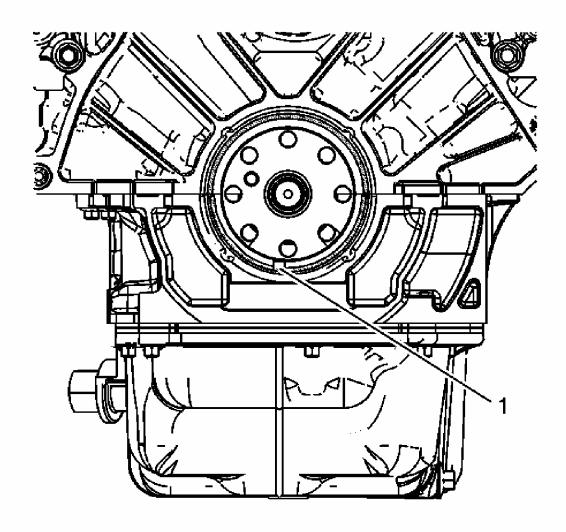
Checking Seal Bore Drain Back Hole Courtesy of GENERAL MOTORS CORP.
